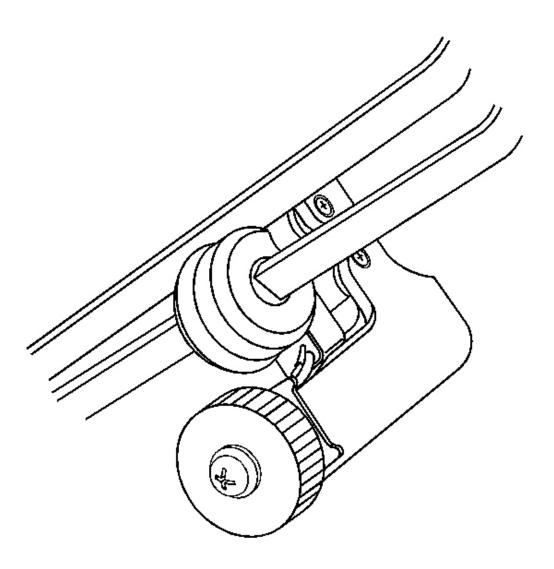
View Of Brake Pipe & Pipe Cutter Courtesy of GENERAL MOTORS CORP.
